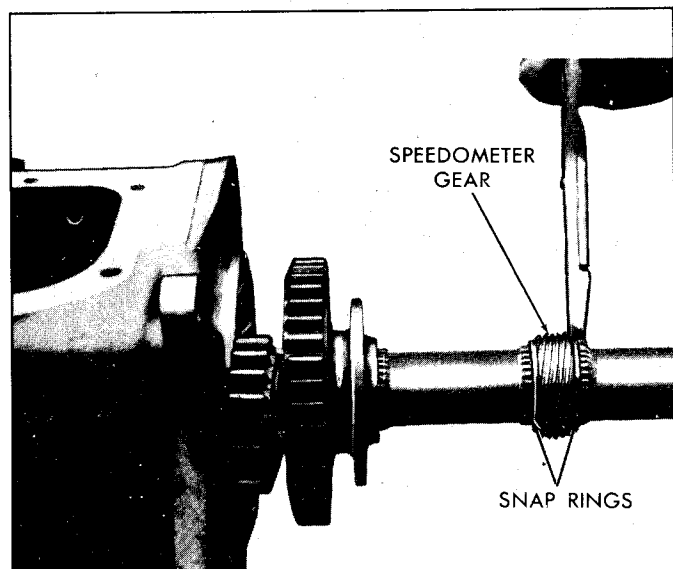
B-4K--Speedometer Gear and Retaining Rings
